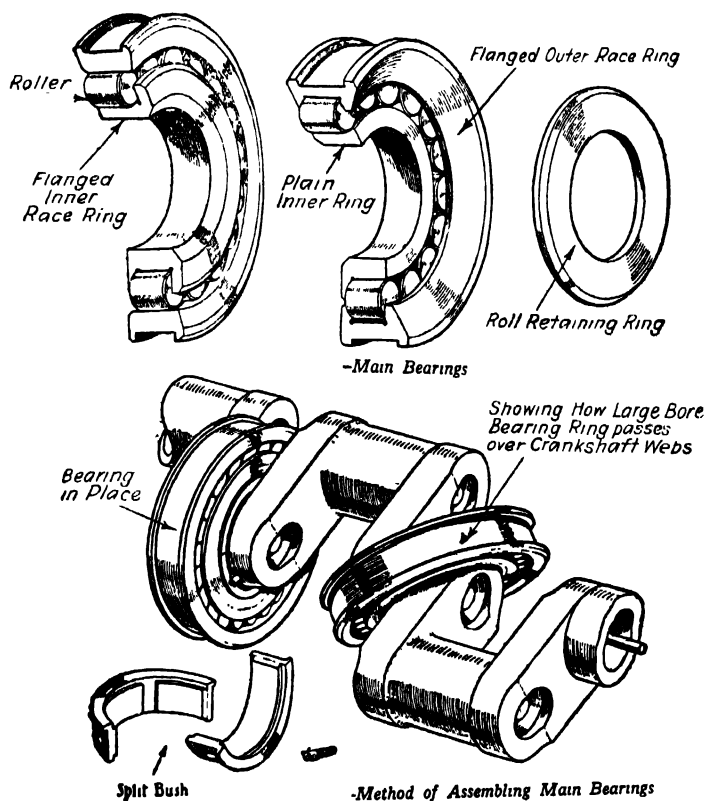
Roller Bearings Used on Napier "Lion" Engine Crankshaft and How Intermediate Bearings May be Removed Over Crankwebs.
